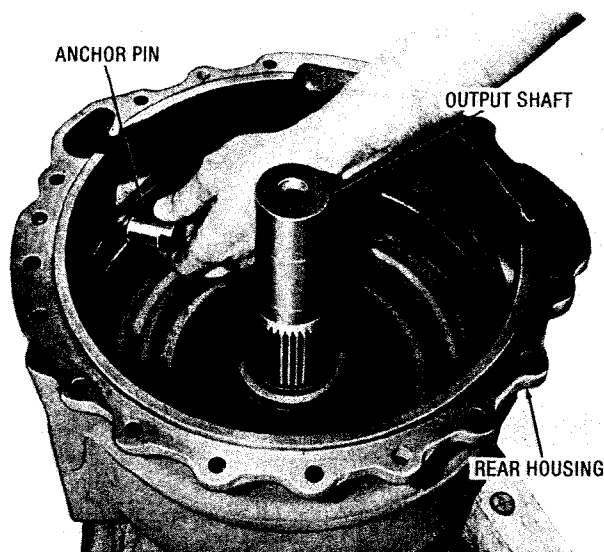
Installing clutch anchor pin (TRT-3 overdrive)
